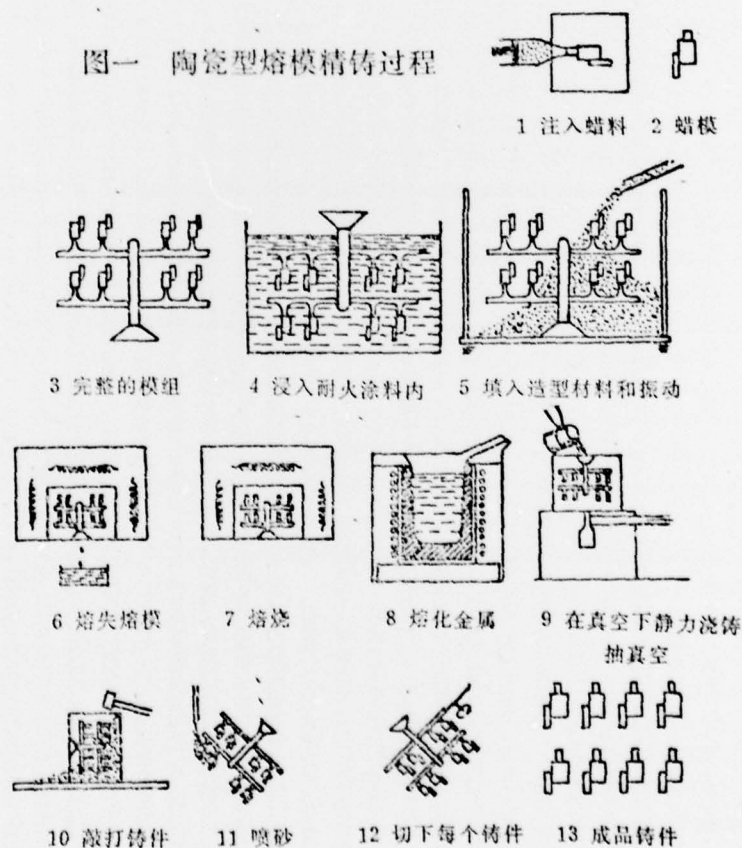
The ceramic pattern precision casting process: 1. injecting wax; 2. wax pattern; 3. pattern assembly; 4. dipping in refractory slurry; 5. fill with mold material and vibrate; 6. melt out the wax pattern; 7. baking; 8. melting the metal; 9. gravity pouring in vacuum; 10. hammering; 11. sand blasting; 12. cutting; 13. end product parts.
